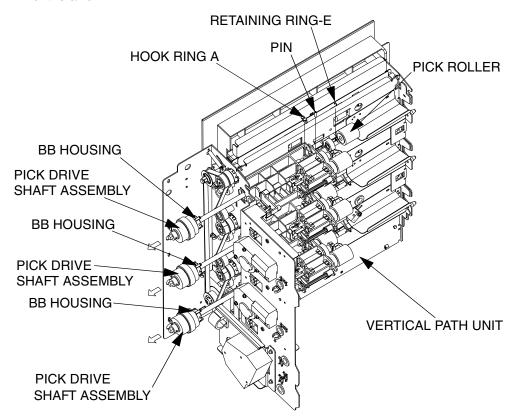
Removal of the Pick Drive Shaft Assembly
